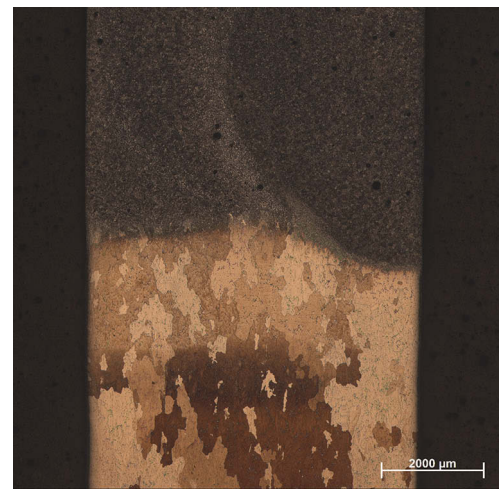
Macro view of AA2219-AA5083 weld joint showing the interface between the weld pool and AA2219. The etchant is Keller's reagent
